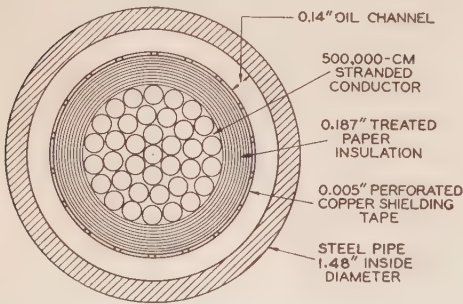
Cross sectional view of 500,000-cir-mil single-conductor cable tested in steel pipe
